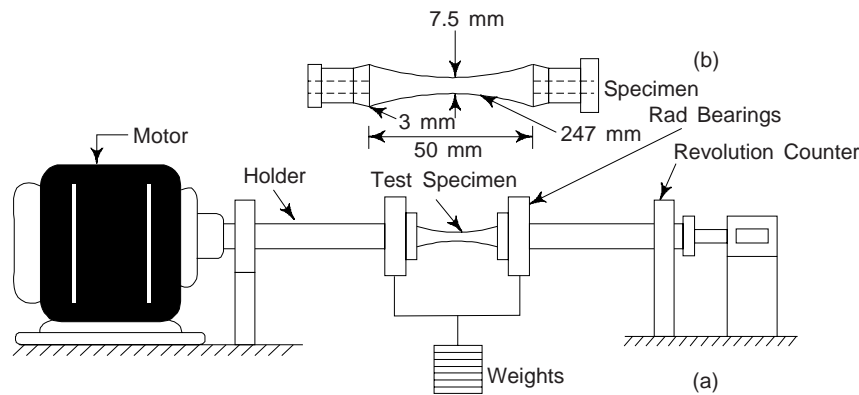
(a) Rotating beam fatigue test Machine (b) fatigue test specimen in bent state
